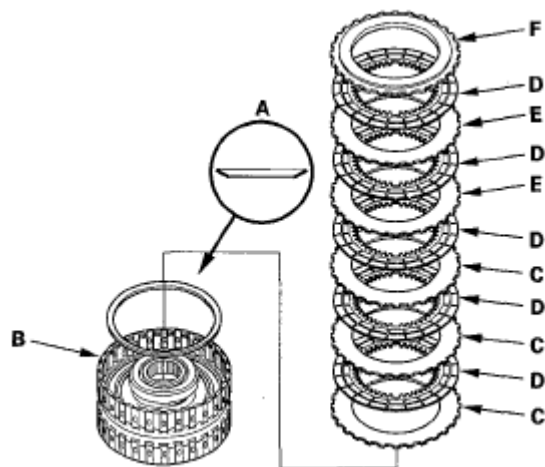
Identifying Disc Spring And 5th Clutch Drum
